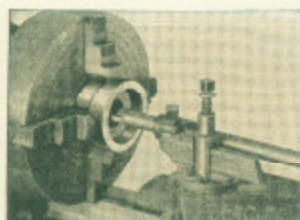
Making a Large Bushing Held in a 4-Jaw Chuck
